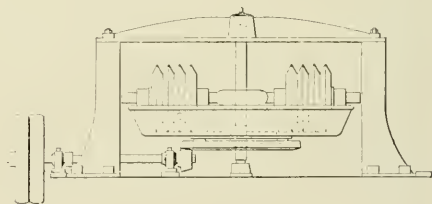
TYPE OF GRINDER PREFERRED BY THE AUTHOR
